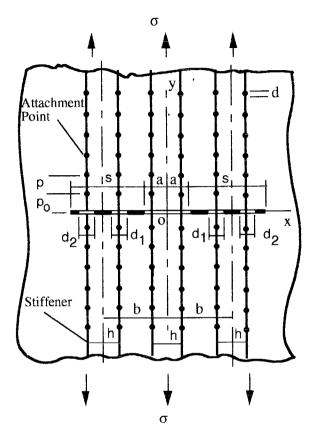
Lead crack and Multiple Site Damage in a Uniformly Stressed Stiffened Sheet
